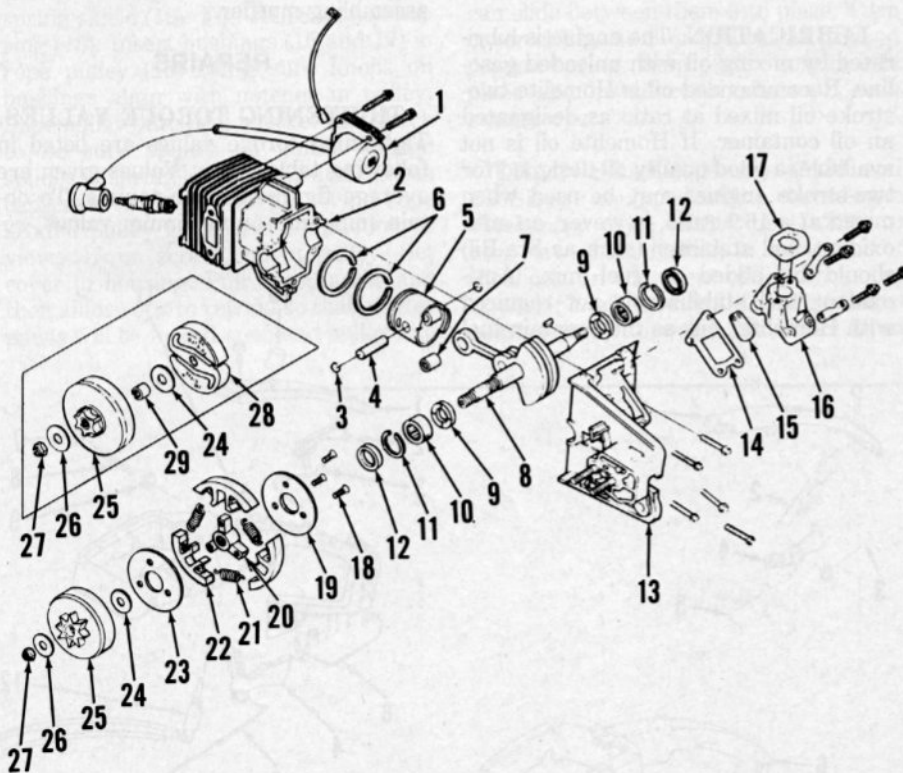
Exploded view of engine and clutch assemblies. Models 245HG and 245SL are equipped with three-shoe clutch. Models 240HG and 240SL are equipped with "S" clutch (inset).
